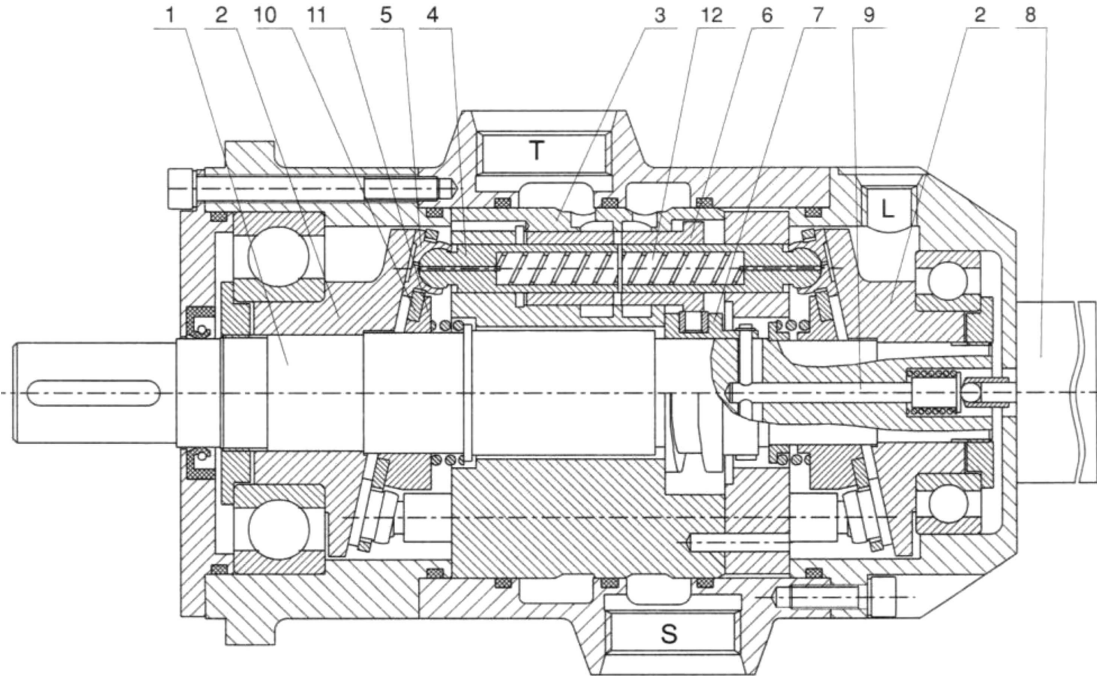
A detailed cross section of the PWK pump (credit: [2]).
